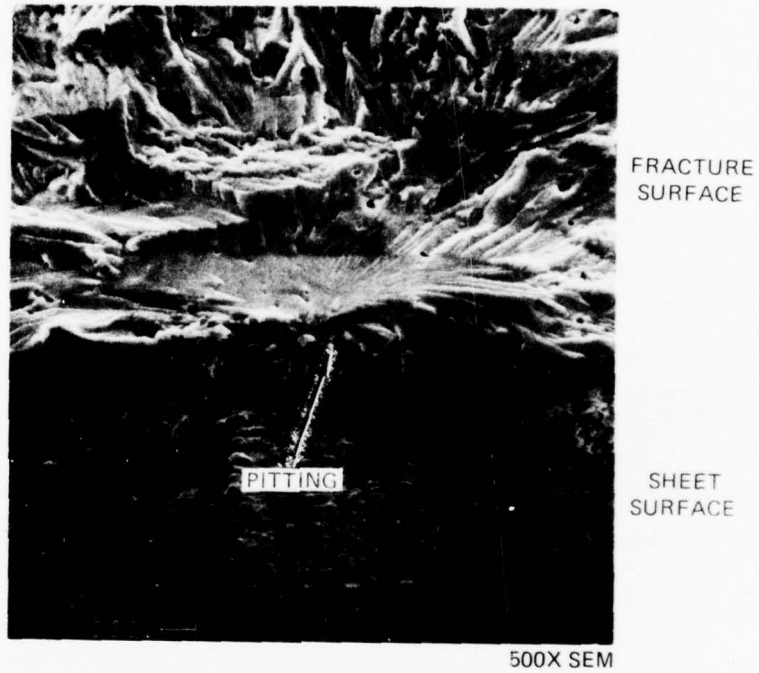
SEVERE PITTING ON THE SURFACE OF A 7075-T6/7075-T6 WELDBONDED SPECIMEN
